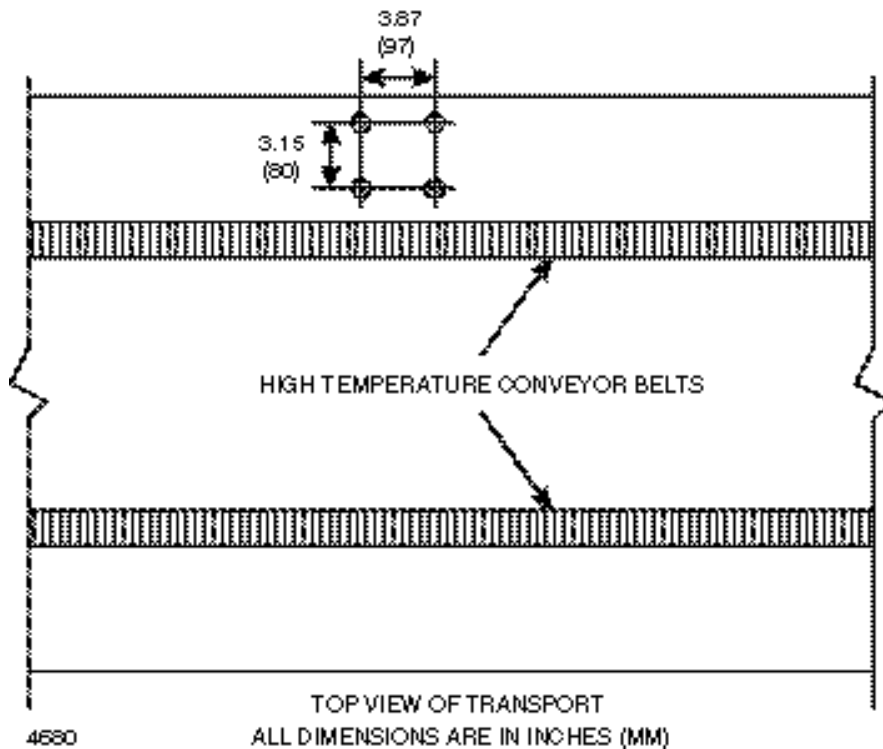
Top View of Transport Illustrating Drill Hole Dimensions.
